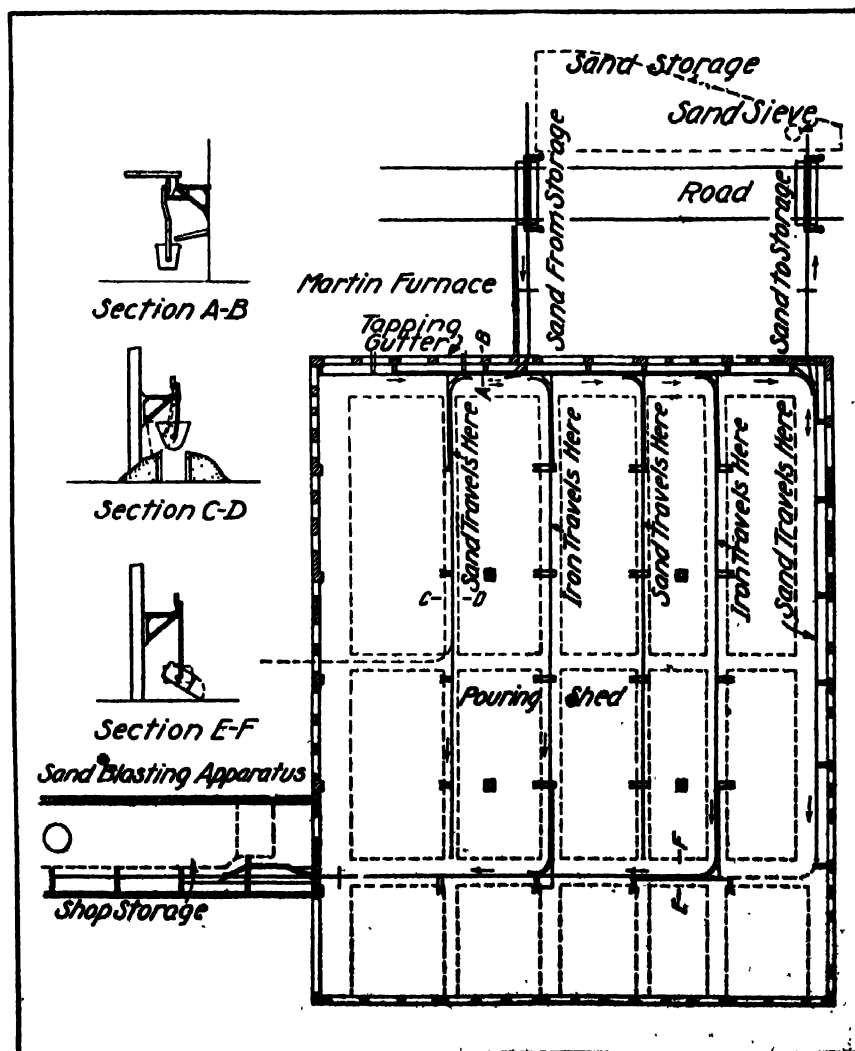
PLAN OF A HAND-OPERATED TROLLEY SYSTEM DESIGNED FOR HANDLING MOLTEN CASTINGS, AND SAND
